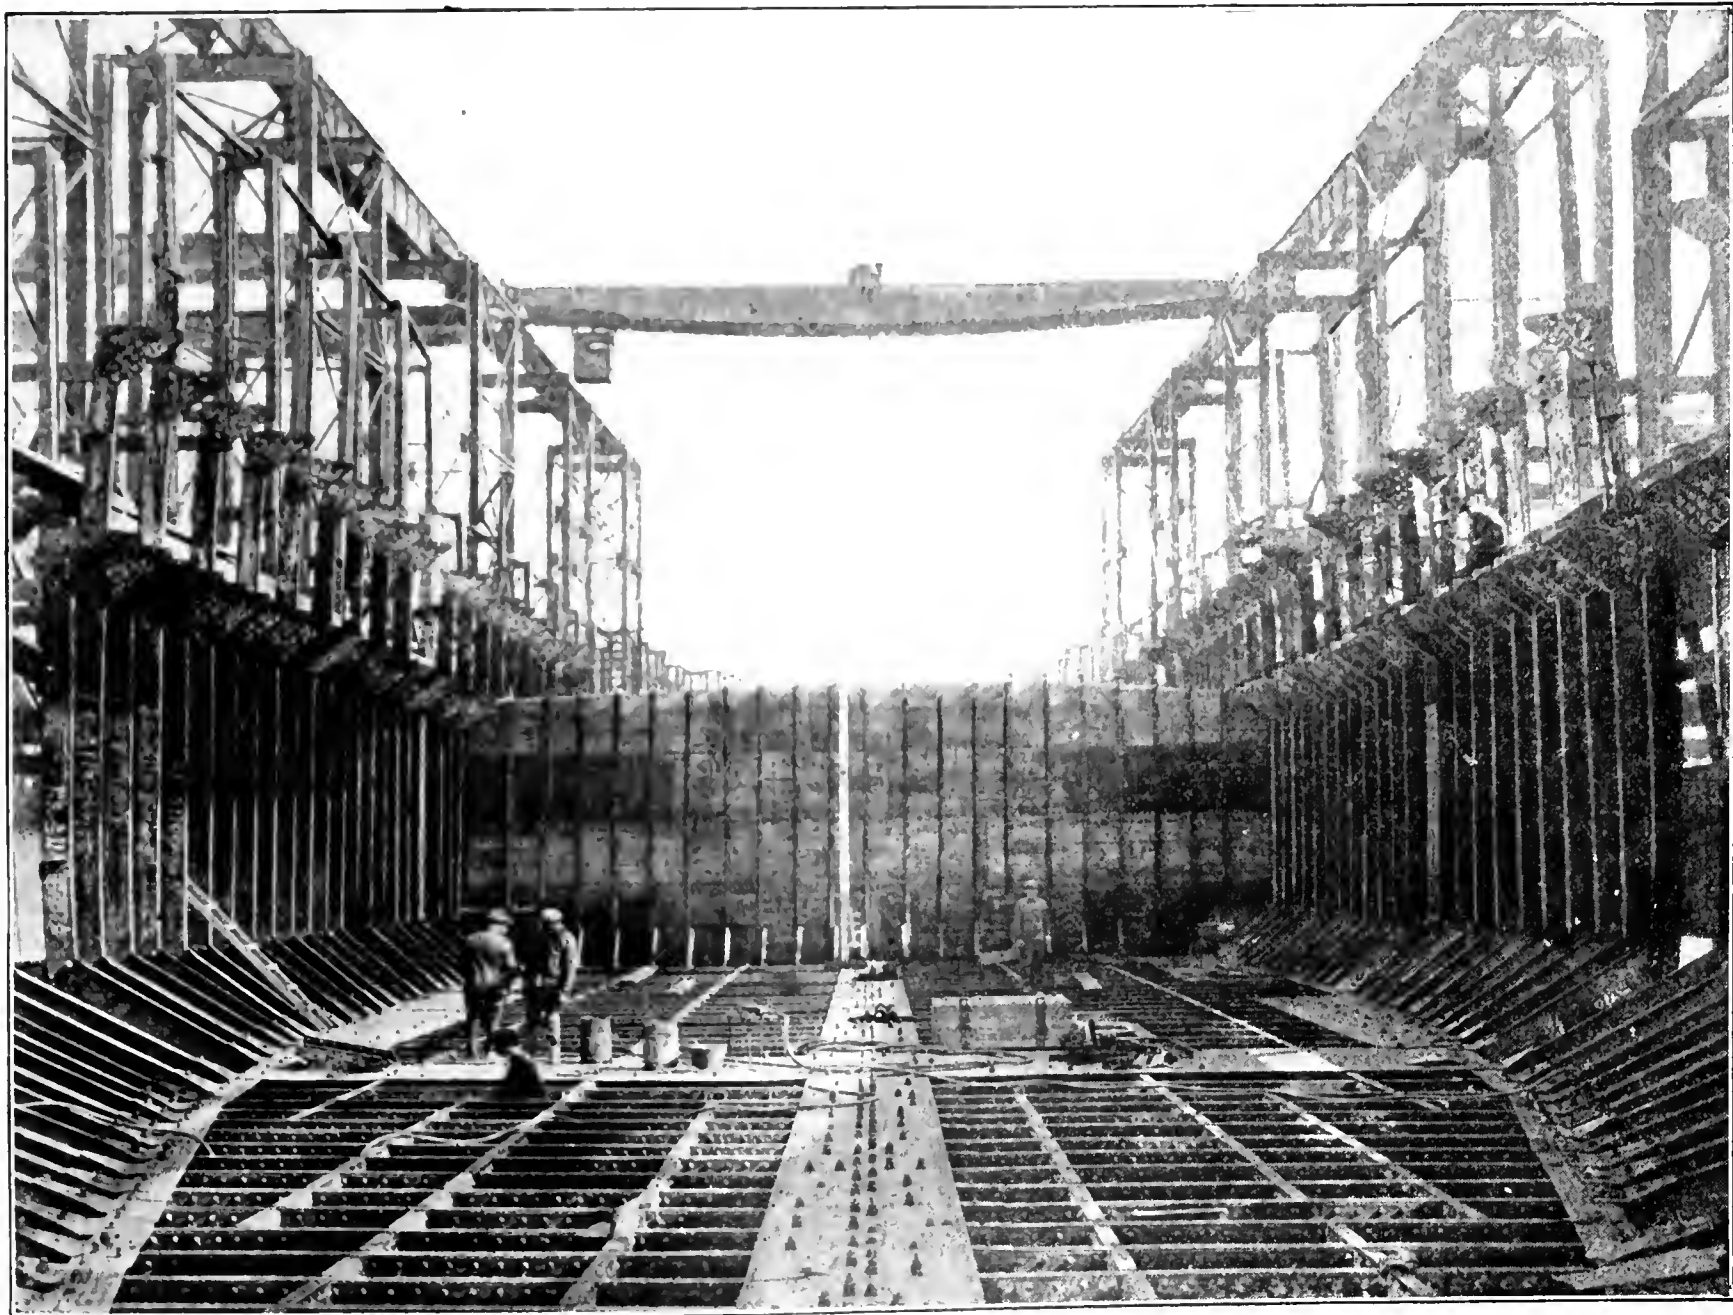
AT SUN SHIPBUILDING COMPANY'S YARD CRANEWAYS 95 FEET HIGH COVER THE 80-FOOT WIDTH OF WAY; TWO CRANES ARE PROVIDED OVER EACH SHIPWAY
